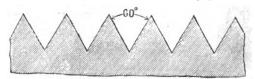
ENLARGED SECTION OF V SCREW-THREAD.
